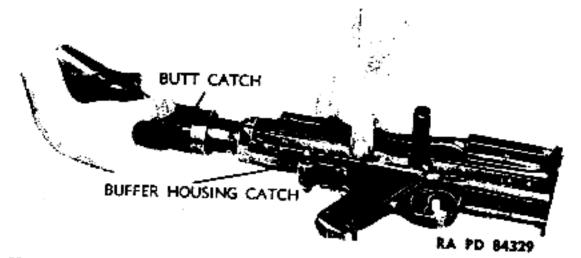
German 7.9-mm Dual Purpose Machine Gun MG34 — Removal of Butt
